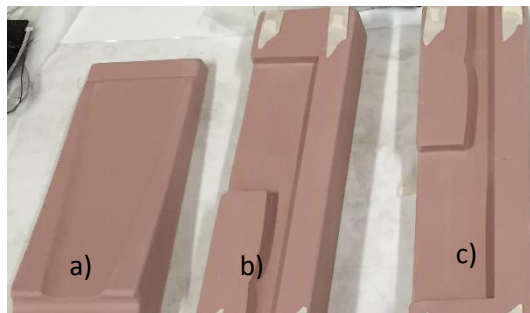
Fuselage access hatch (a) and empennage support [b) and c)] moulds finished.
